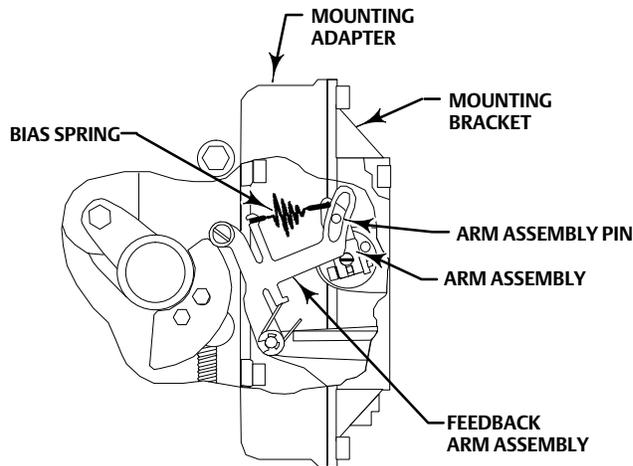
FIELDVUE DVC6020 SIS Digital Valve Controller Mounted on Rotary Actuators
